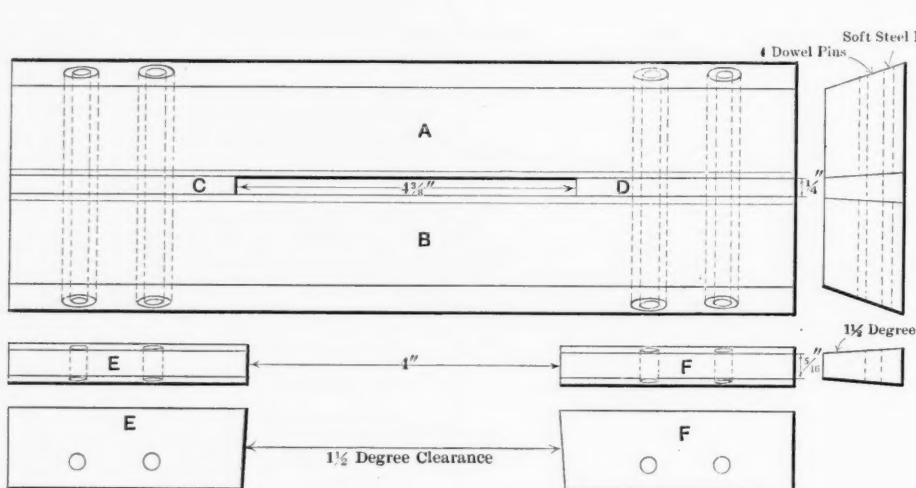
Die with Interchangeable Parts, permitting Two Sizes of Blanks to be Punched by Changing the Center Pieces only.
